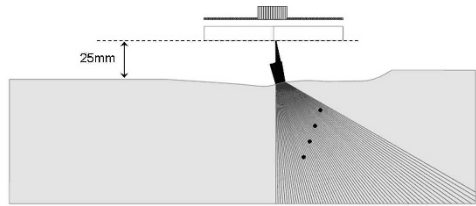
Inspected piece containing a set of side drilled holes under the irregular surface.
